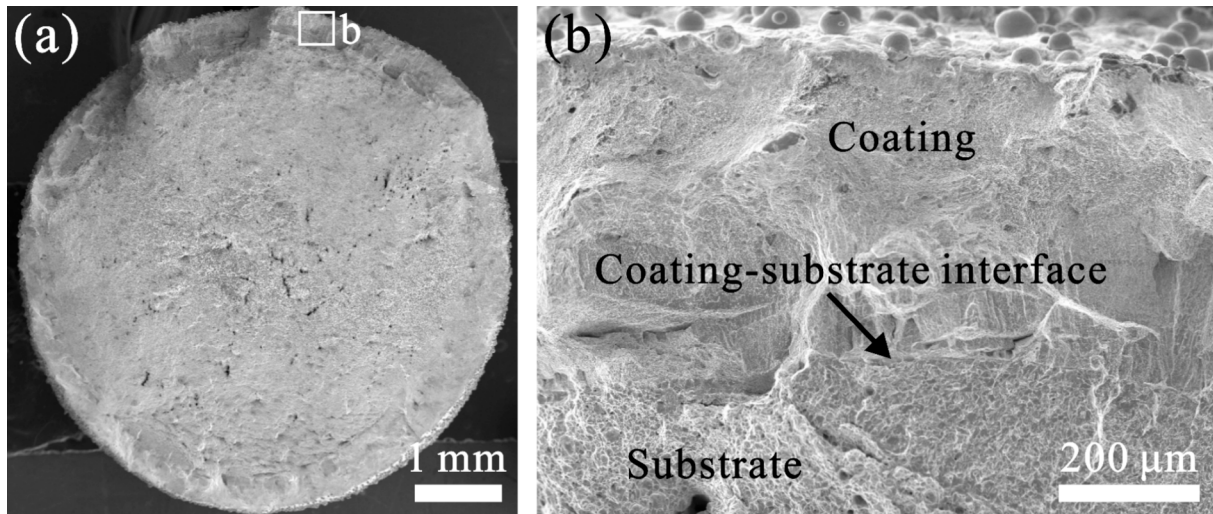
Tensile fracture surface of the 1.8 kW double-layer coated specimen: (a) The whole sample and (b) Magnified coating-substrate interface.
